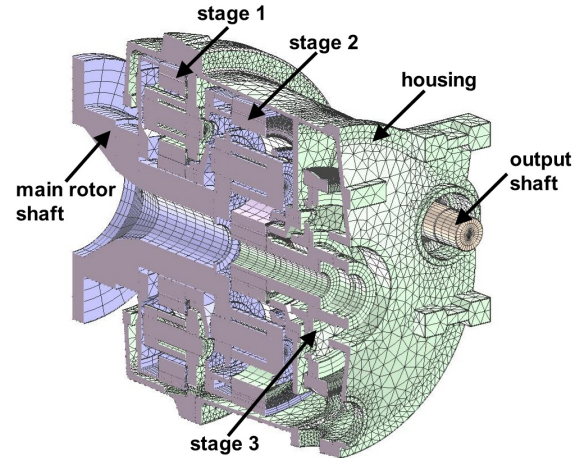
CUTAWAY VIEW OF THE FINITE ELEMENT MODEL OF THE ORBITAL2 W3600 GEAR TRAIN.
